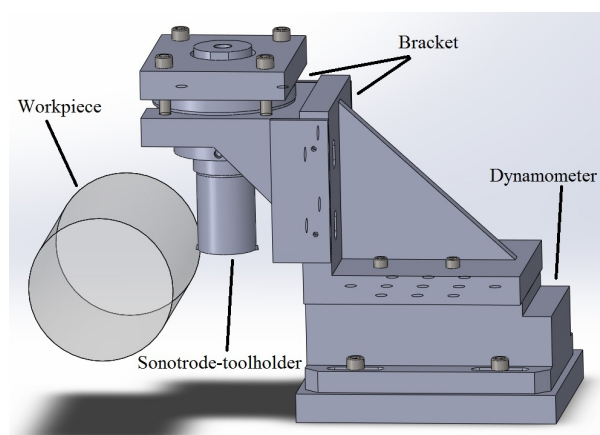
Assembly of sonotrode mounted on holder with Kistler dynamometer
